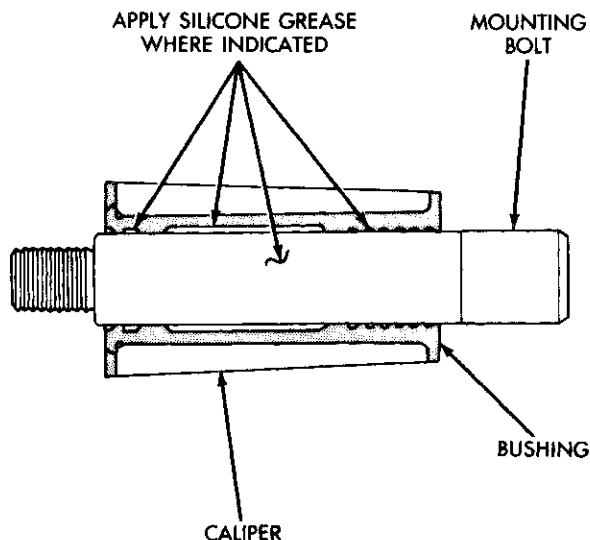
Mounting Bolt Lubrication (80 or 86mm Caliper)
